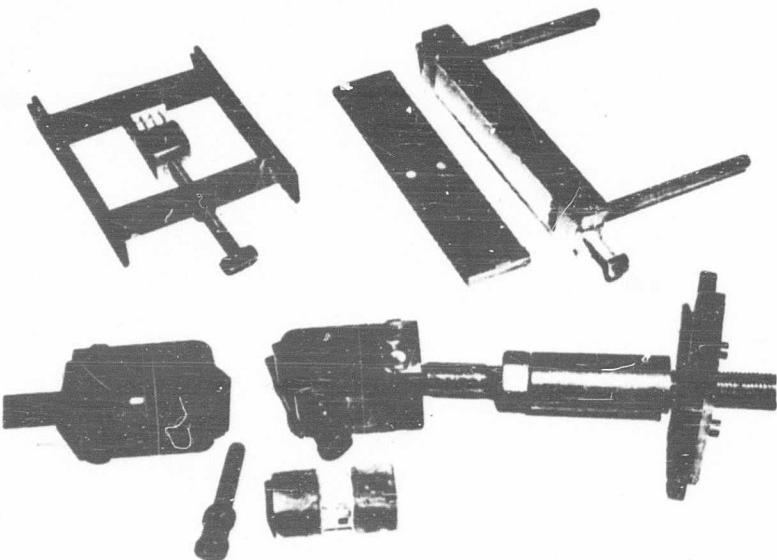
Flatwise tensile test apparatus. Upper left: Curing fixture for "422" bonded blocks. Upper right: Block-sanding fixture with height control platform. Bottom: Modified Forest Products Laboratory flatwise tensile grips (lower grip is at right, with centering plug in place)
